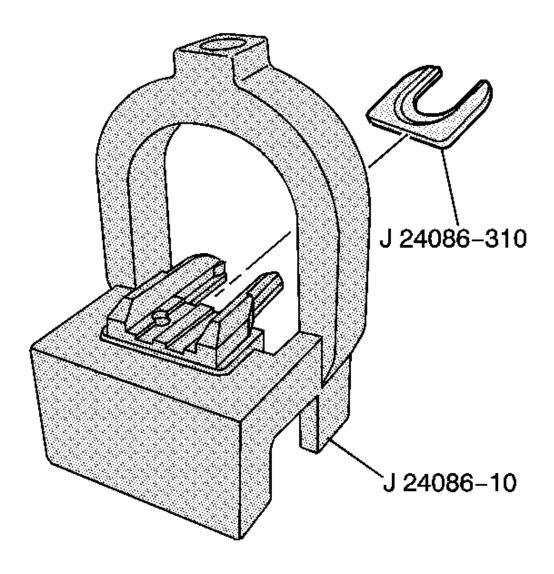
Installing J 24086-310 Into J 24086-10 Courtesy of GENERAL MOTORS CORP.
